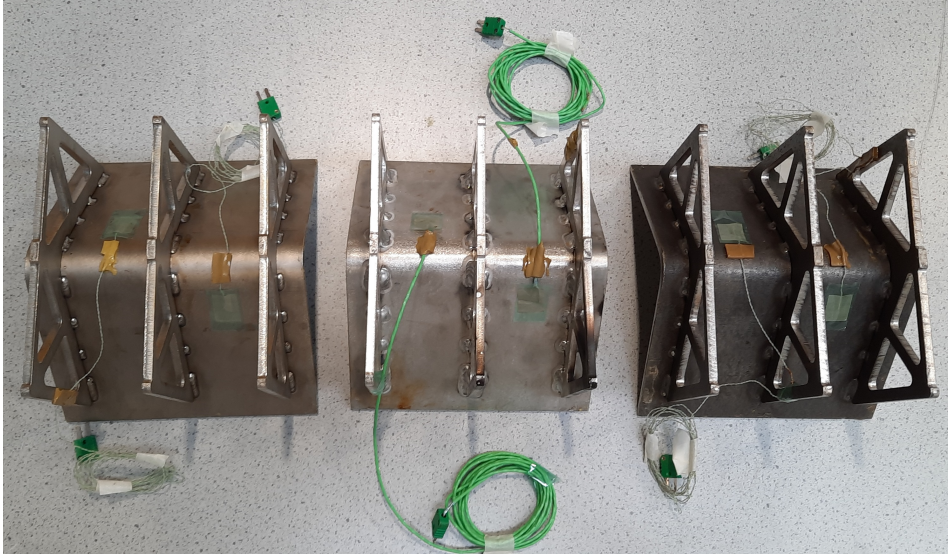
Thermocouples setup: Two thermocouples were placed on the underside of the tool near the corner.
